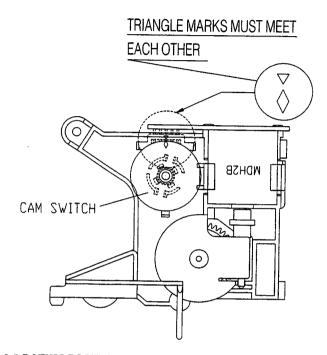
DATUM POSITION OF CAM SWITCH TRIANGULAR MARKS
